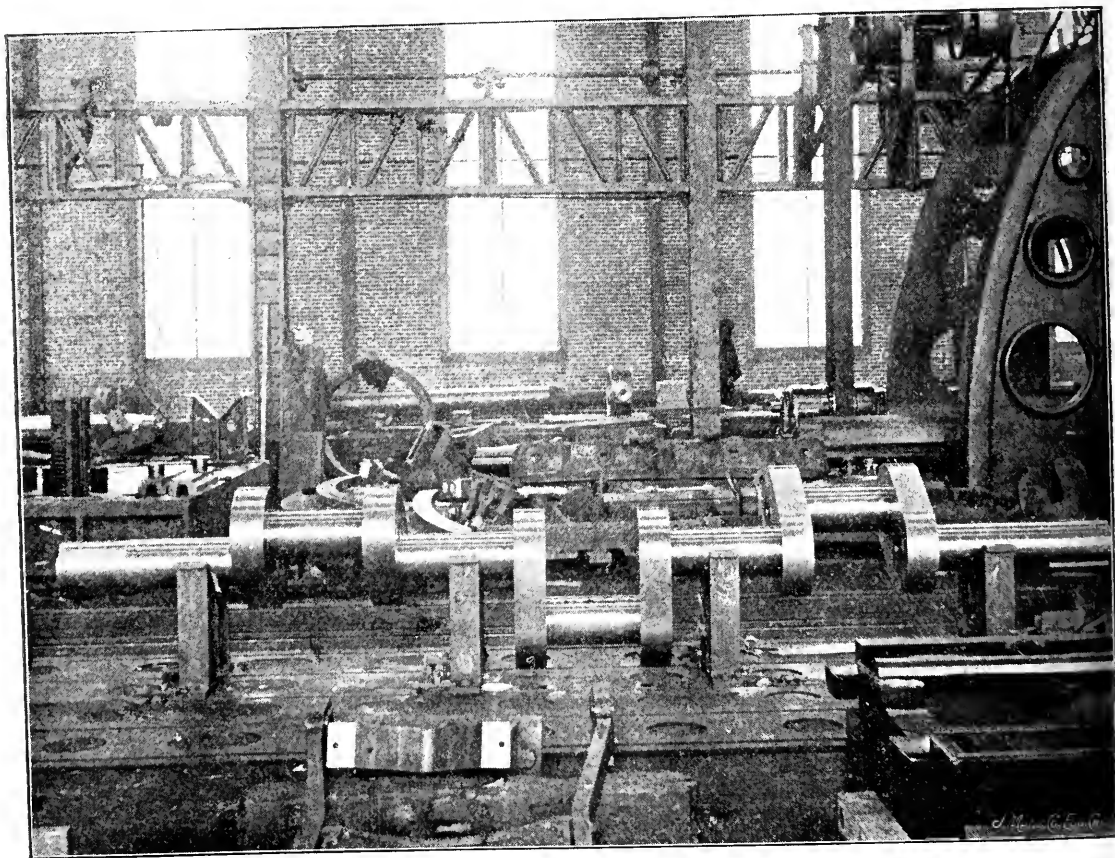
Three-throw Built-up Crank Shaft for Pope Mfg. Company's Pumping Engine; engine built by Fraser & Chalmers Chicago, Ill. Diameter of shaft and pins, 11 in.; diameter of bore, 4 in.; total length, 19 ft. 11 in.; weight, 12,100 pounds.
